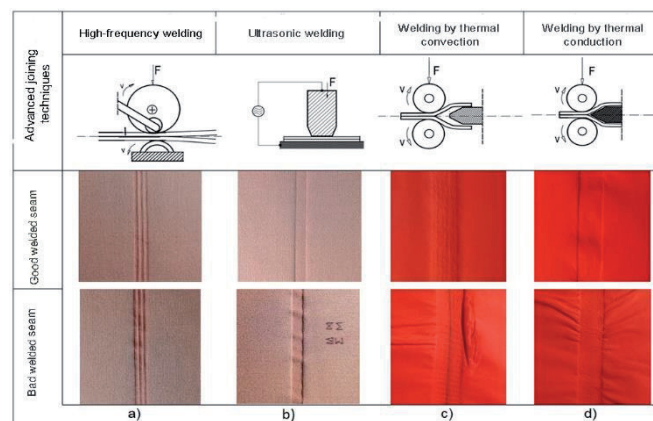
Advanced joining techniques and welds (good and bad): a. HF welding; b. ultrasonic welding; c. thermal welding by convection; d. thermal welding by conduction
